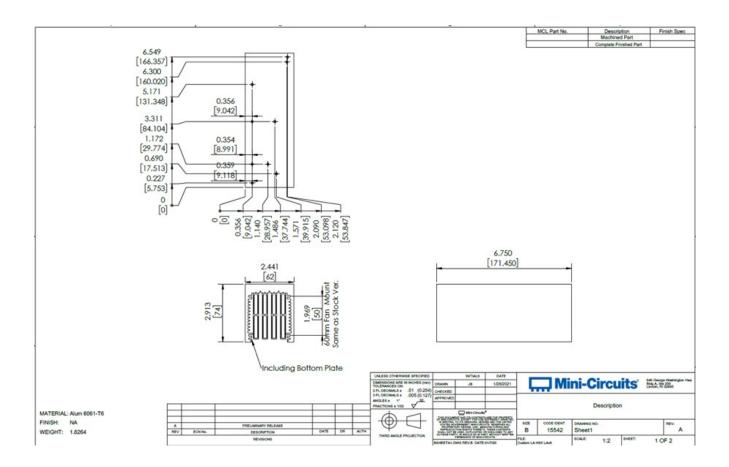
Outline drawing of the HSK-2425-250+ heat sink, the exact locations of the screw holes are shown
